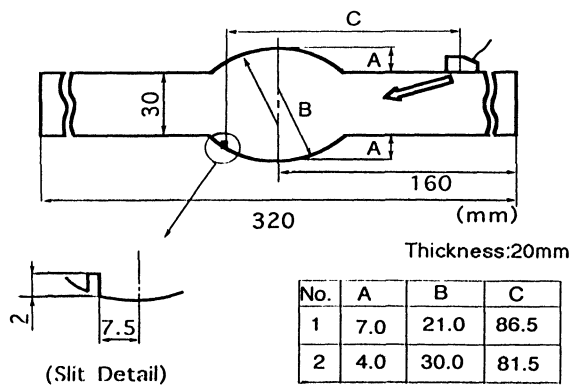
Dimensions of specimen (model butt welded joints).
